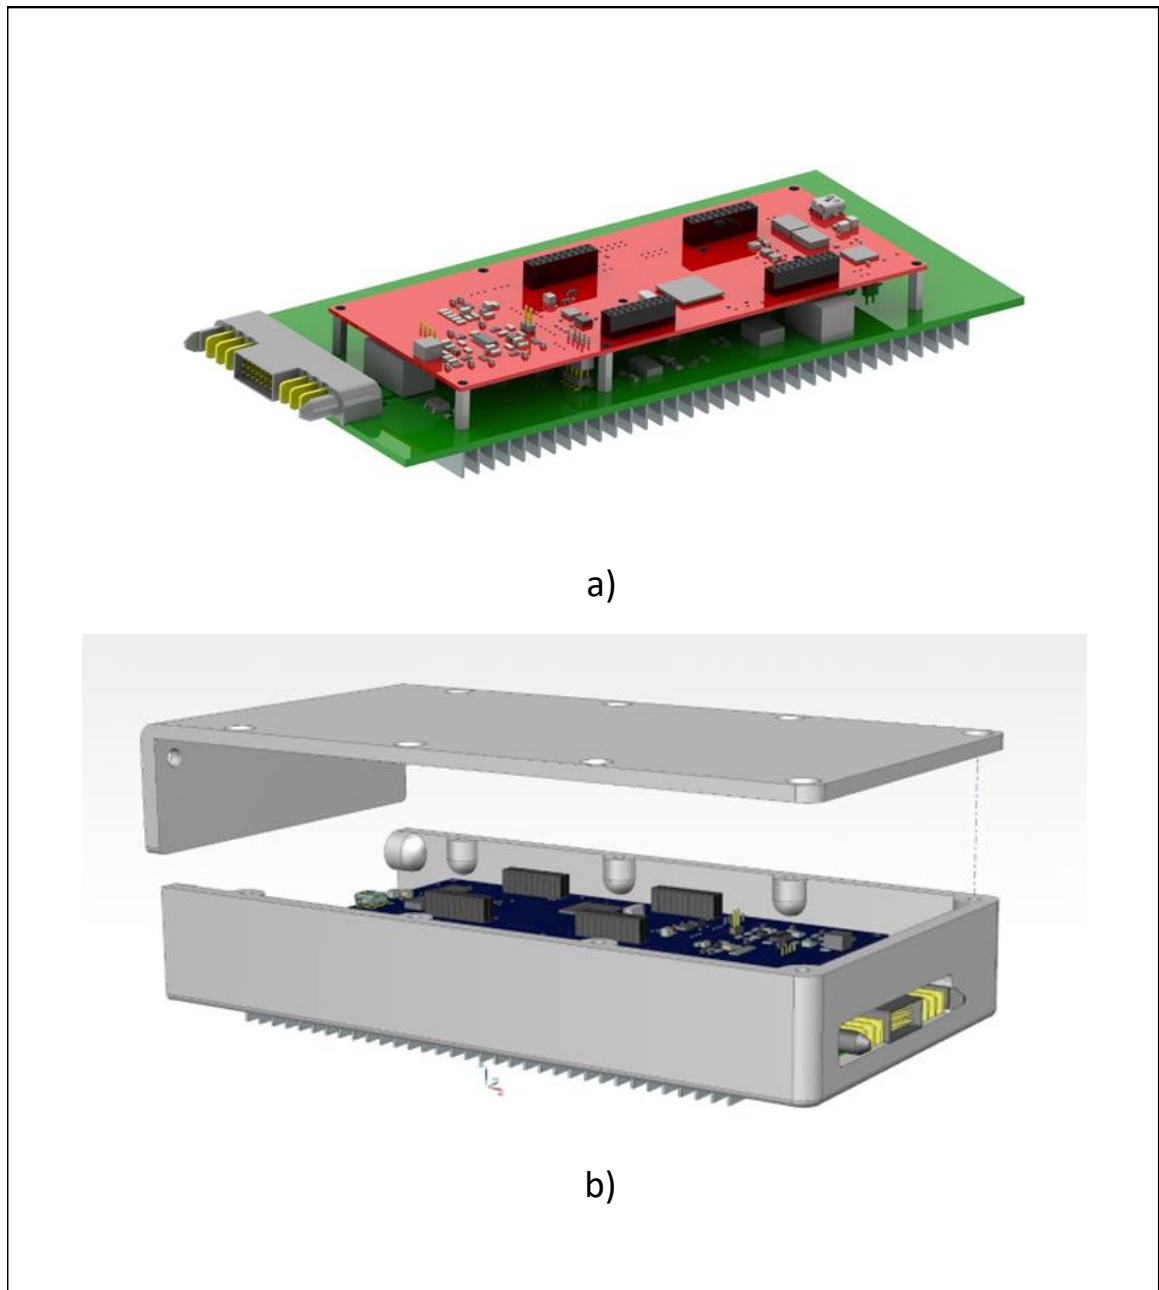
Designed SSPC PCB Assembly. a) Board stack assembly b) SSPC in 3D printed enclosure
